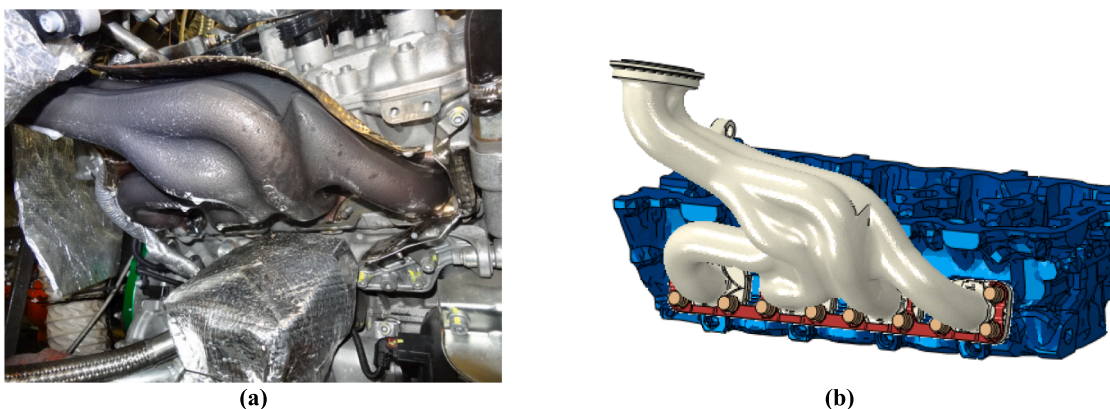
Engine C1 - (a) Detail of the right-hand side exhaust manifold; (b) Finite Element model.
